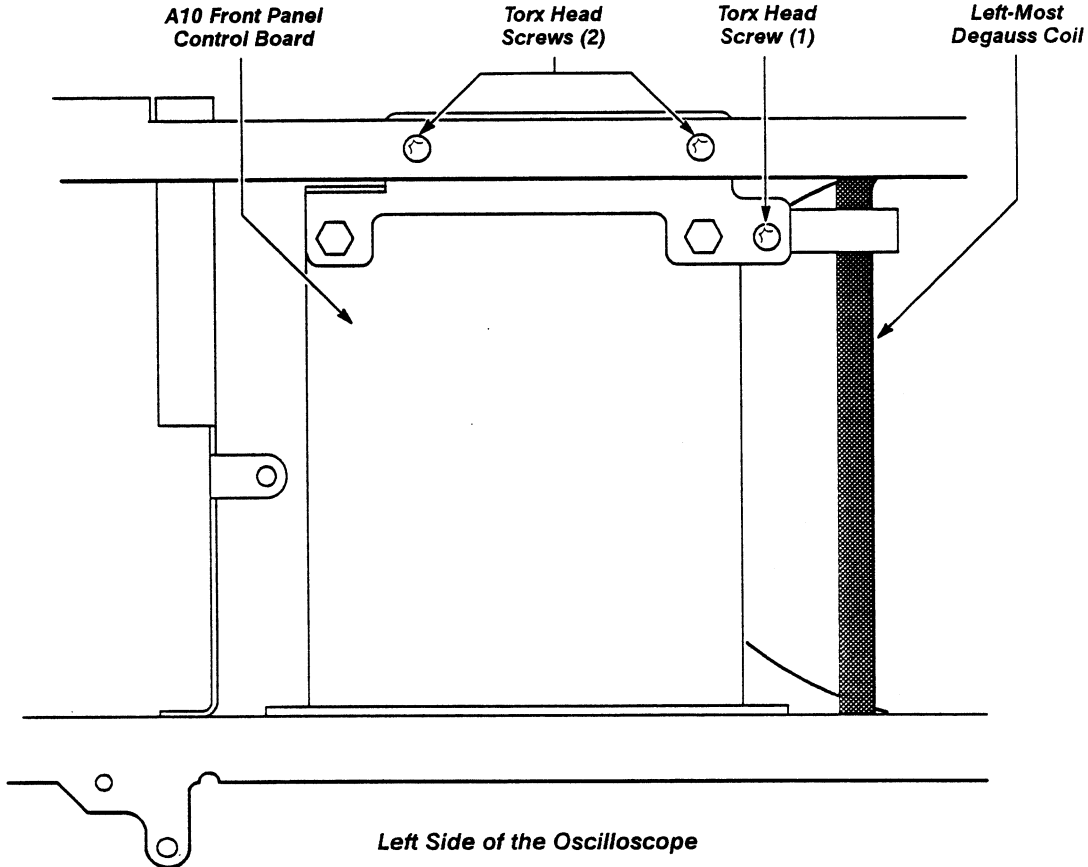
Removing/Replacing the A10 Front Panel Control Board Torx Head Screws
